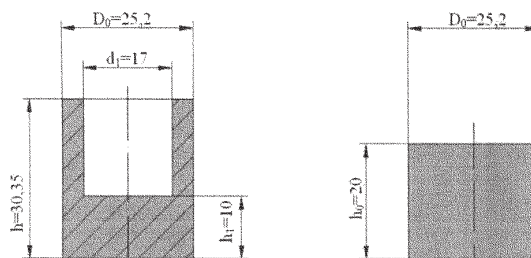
Final and starting dimensions of specimen in backward extrusion
